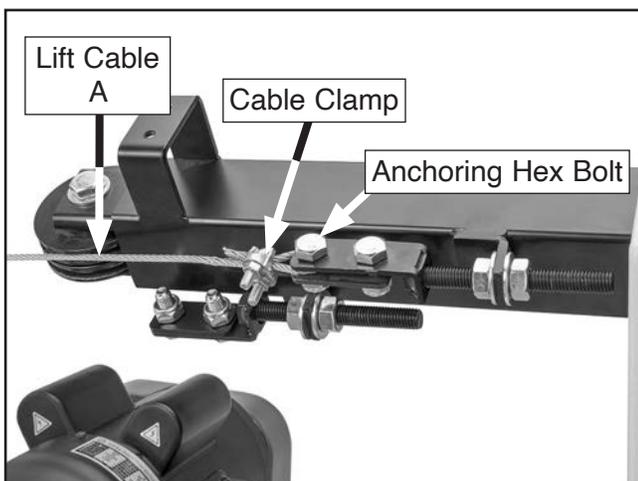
First end of lift cable A secured (switch panel removed for clarity).
